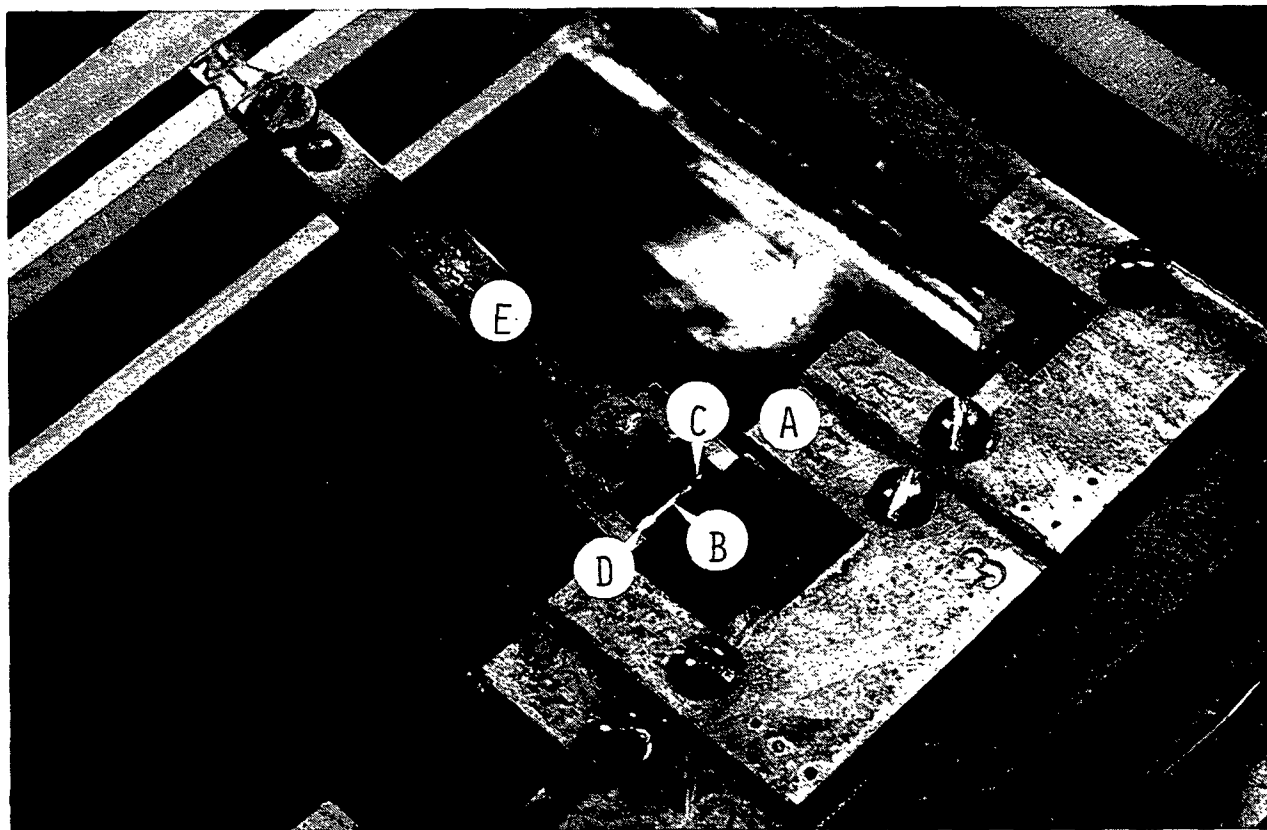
A mounted lap joint and mounting apparatus consisting of: (A) pin clamps, (B) lap joint, (C) dowel pins, (D) epoxy resin bead, and (E) pin holder.
